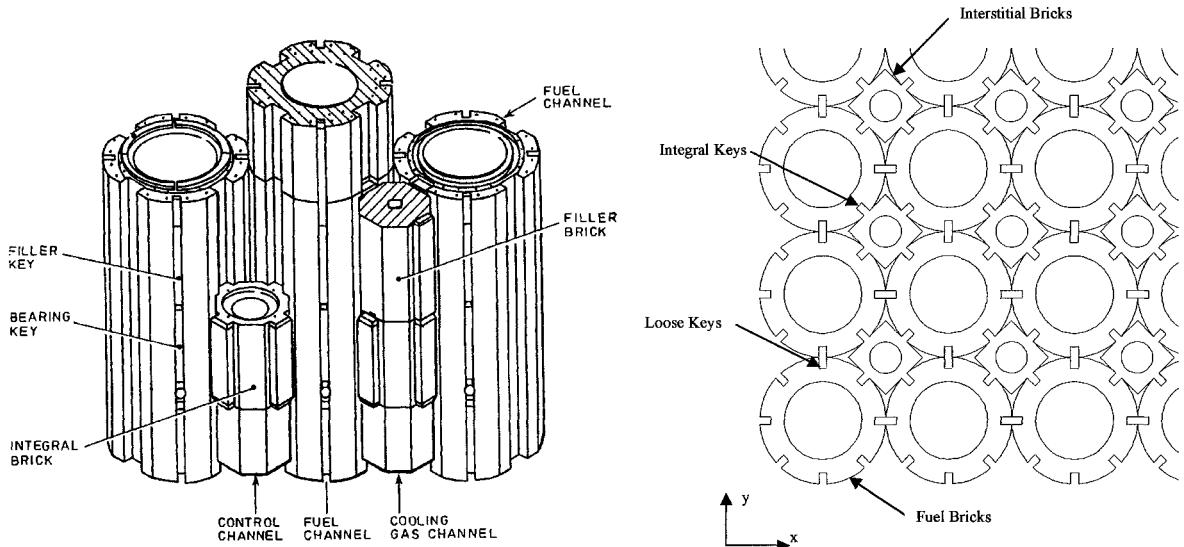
Core Components and Plan of Keying Arrangement in a Brick Layer
